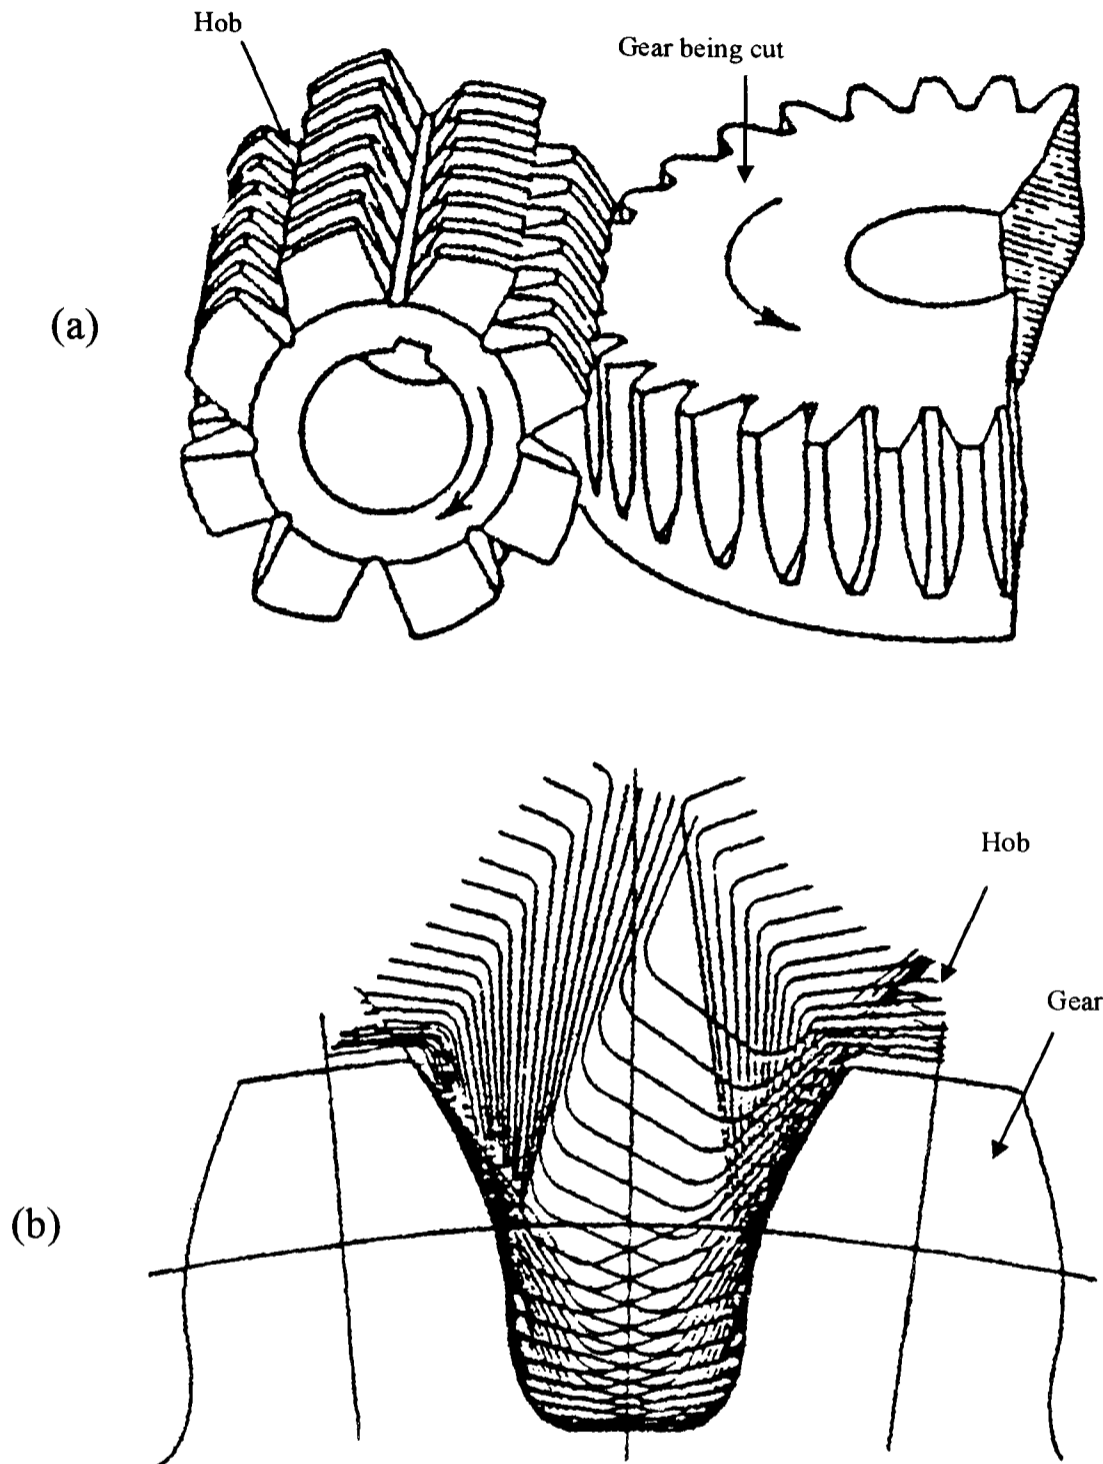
(a) The hobbing process, (b) gear generation, relative to gear [BGA].
